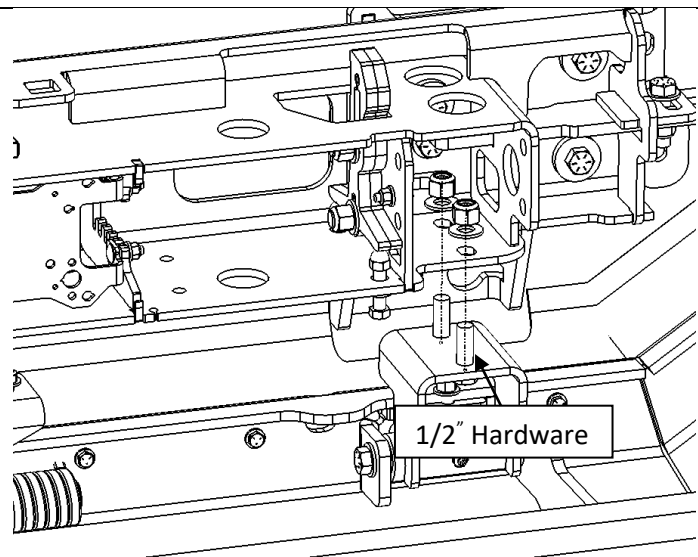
Bracket and Truck guard Disassembly (Driver Side Shown)
